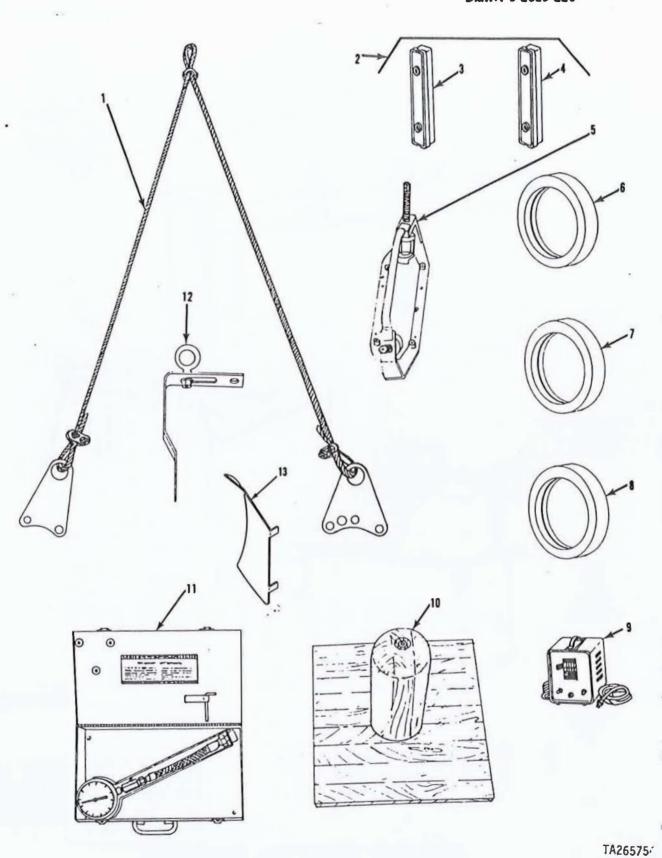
Special tools and equipment (sheet 1 of 2).
